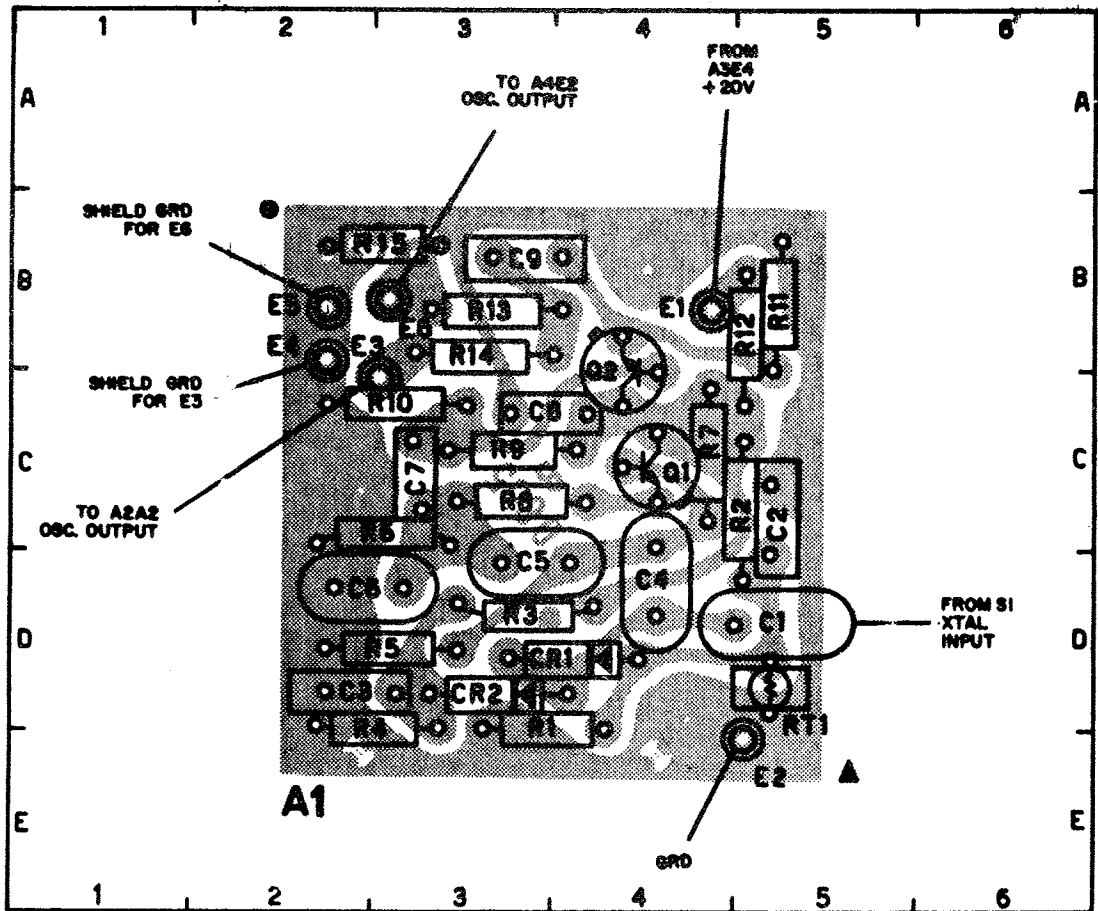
MC Oscillator AGC (Foil Side Up), Component and Test Point Location
